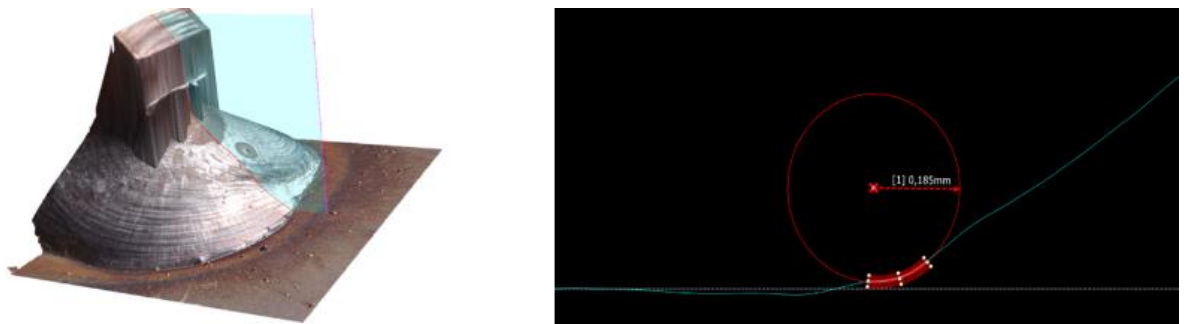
Scanned weld shape of a S700 test specimen.
